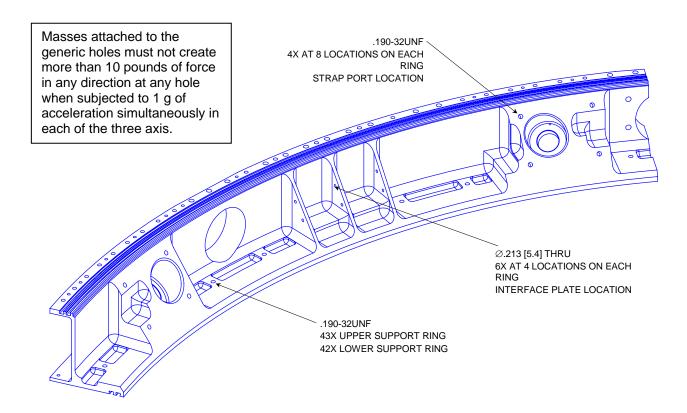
ISO View Section of Generic Holes for CM
